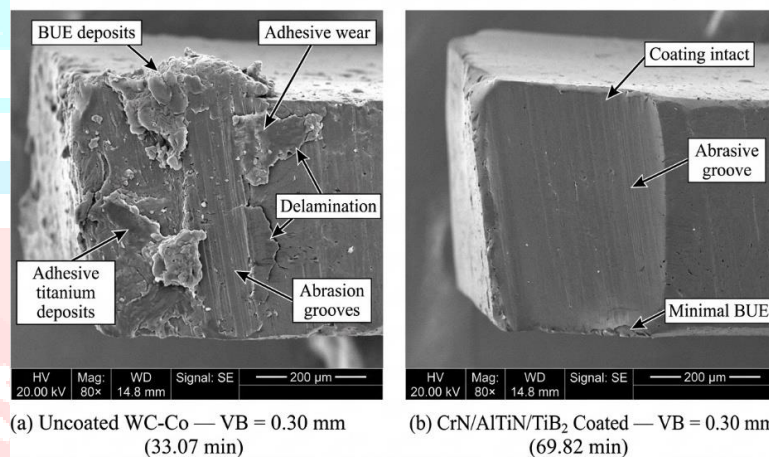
SEM micrographs of worn tool flank face at end of tool life ($VB_{\text{max}} = 0.30 \text{ mm}$): (a) uncoated WC-Co showing adhesive BUE deposits and diffusion wear; (b) CrN/AlTiN/TiB₂-coated tool showing abrasive grooves with intact residual coating and tribo-oxide film.
